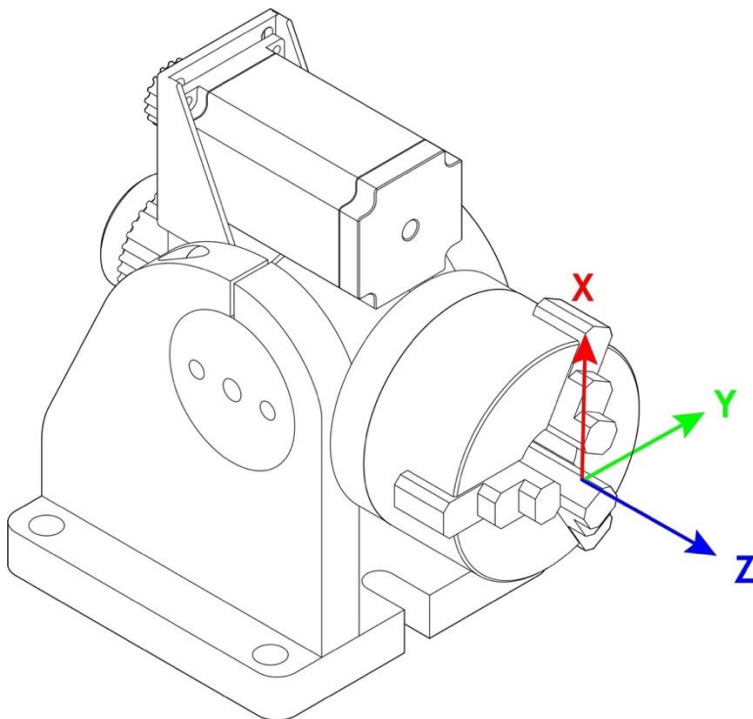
Third-axis projection of gear hobbing attachment showing main axis labels
